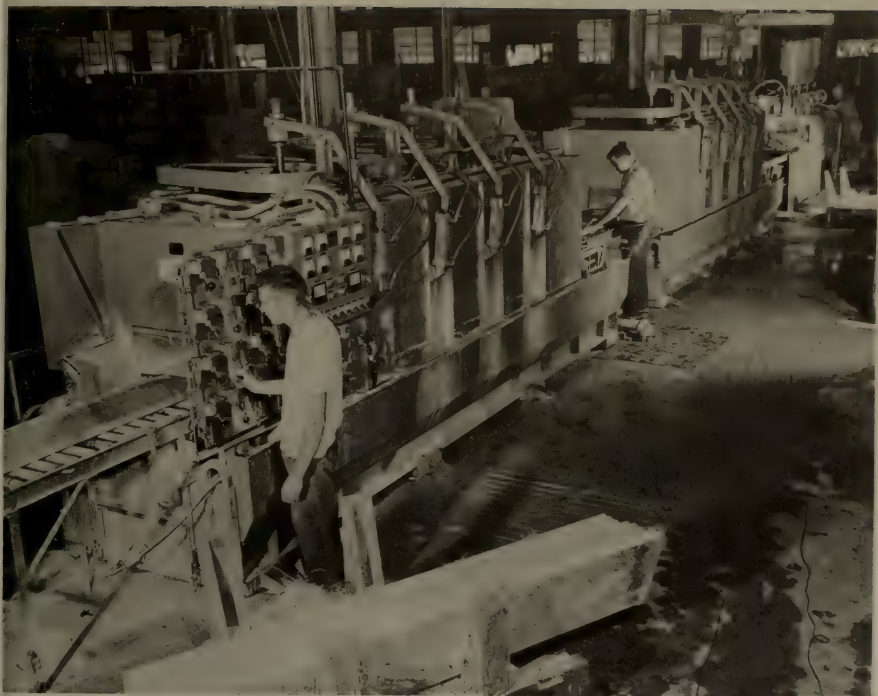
Strip Polishing Machines. (*Courtesy, Vermont Marble Co.*)
